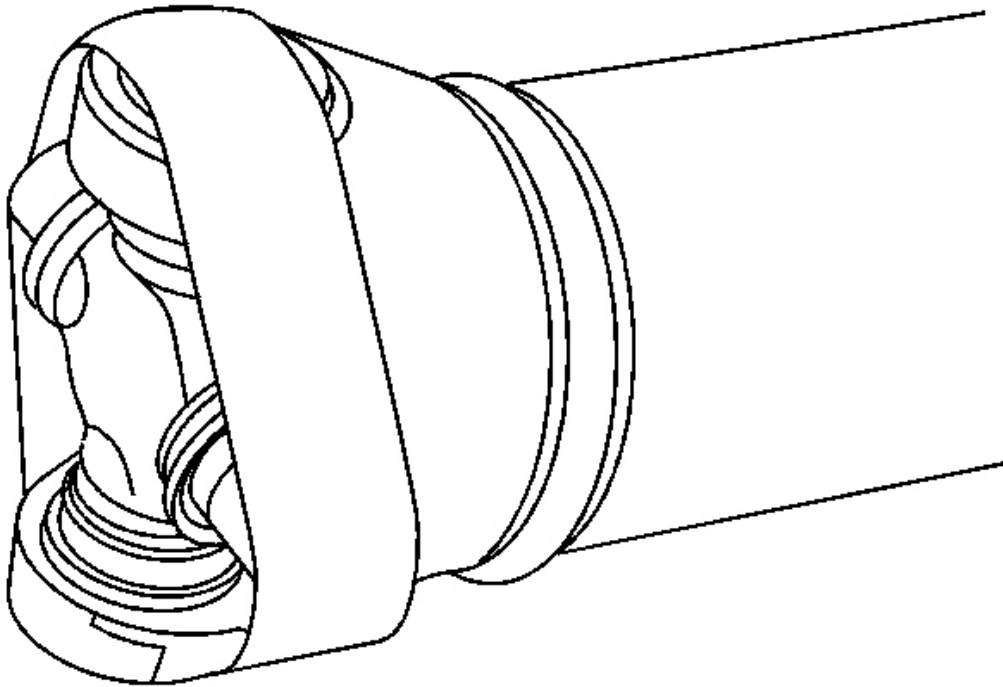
View Of Wrapped U-Joint Bearing Caps
